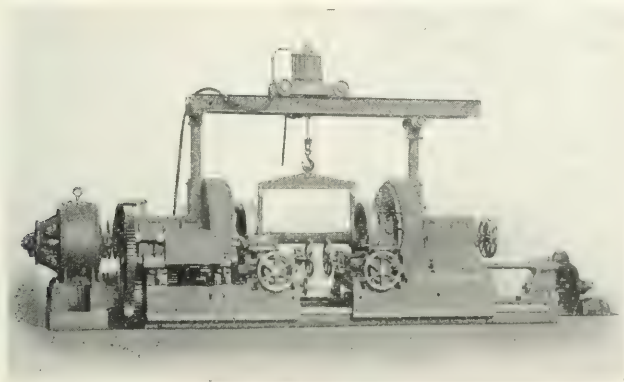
SELLERS CAR WHEEL LATHE, DRIVEN BY A 35 HORSE-POWER DIRECT-CURRENT MOTOR
